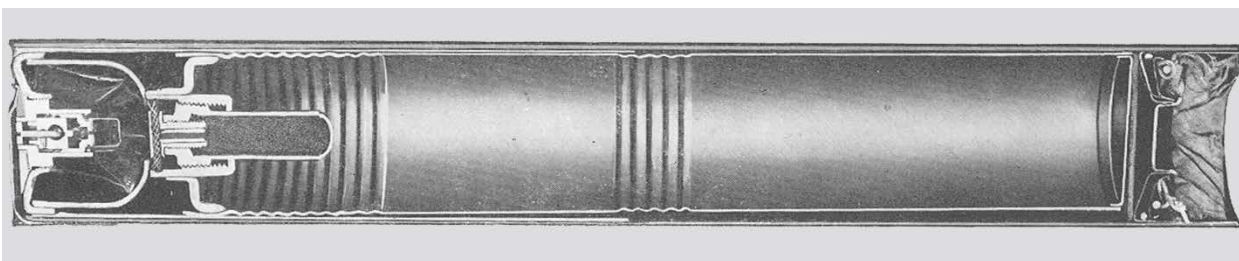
Bomb, 10-pound, Ejection Airburst, EK-4 (EK-2) - Photograph - Cutaway View
